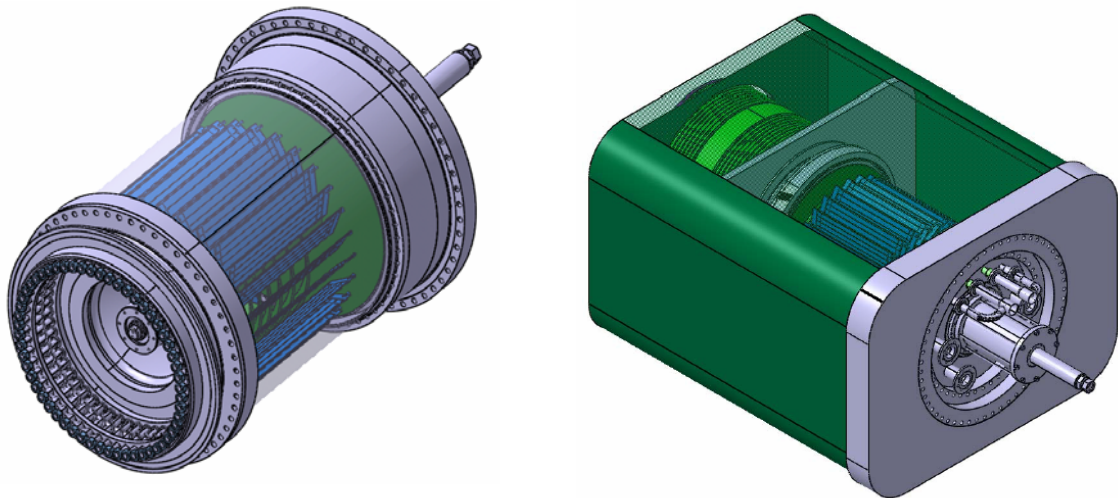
Drawing of the prototype torus pump as single unit (left, without outer 80 K shield and housing) and as installed in the duct with the bellow (right).
